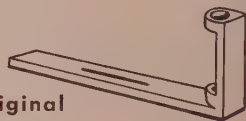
Former Design of bracket was gray iron . . . is now fabricated from 12 gauge steel. Steel design is rugged, durable, will not fracture.
